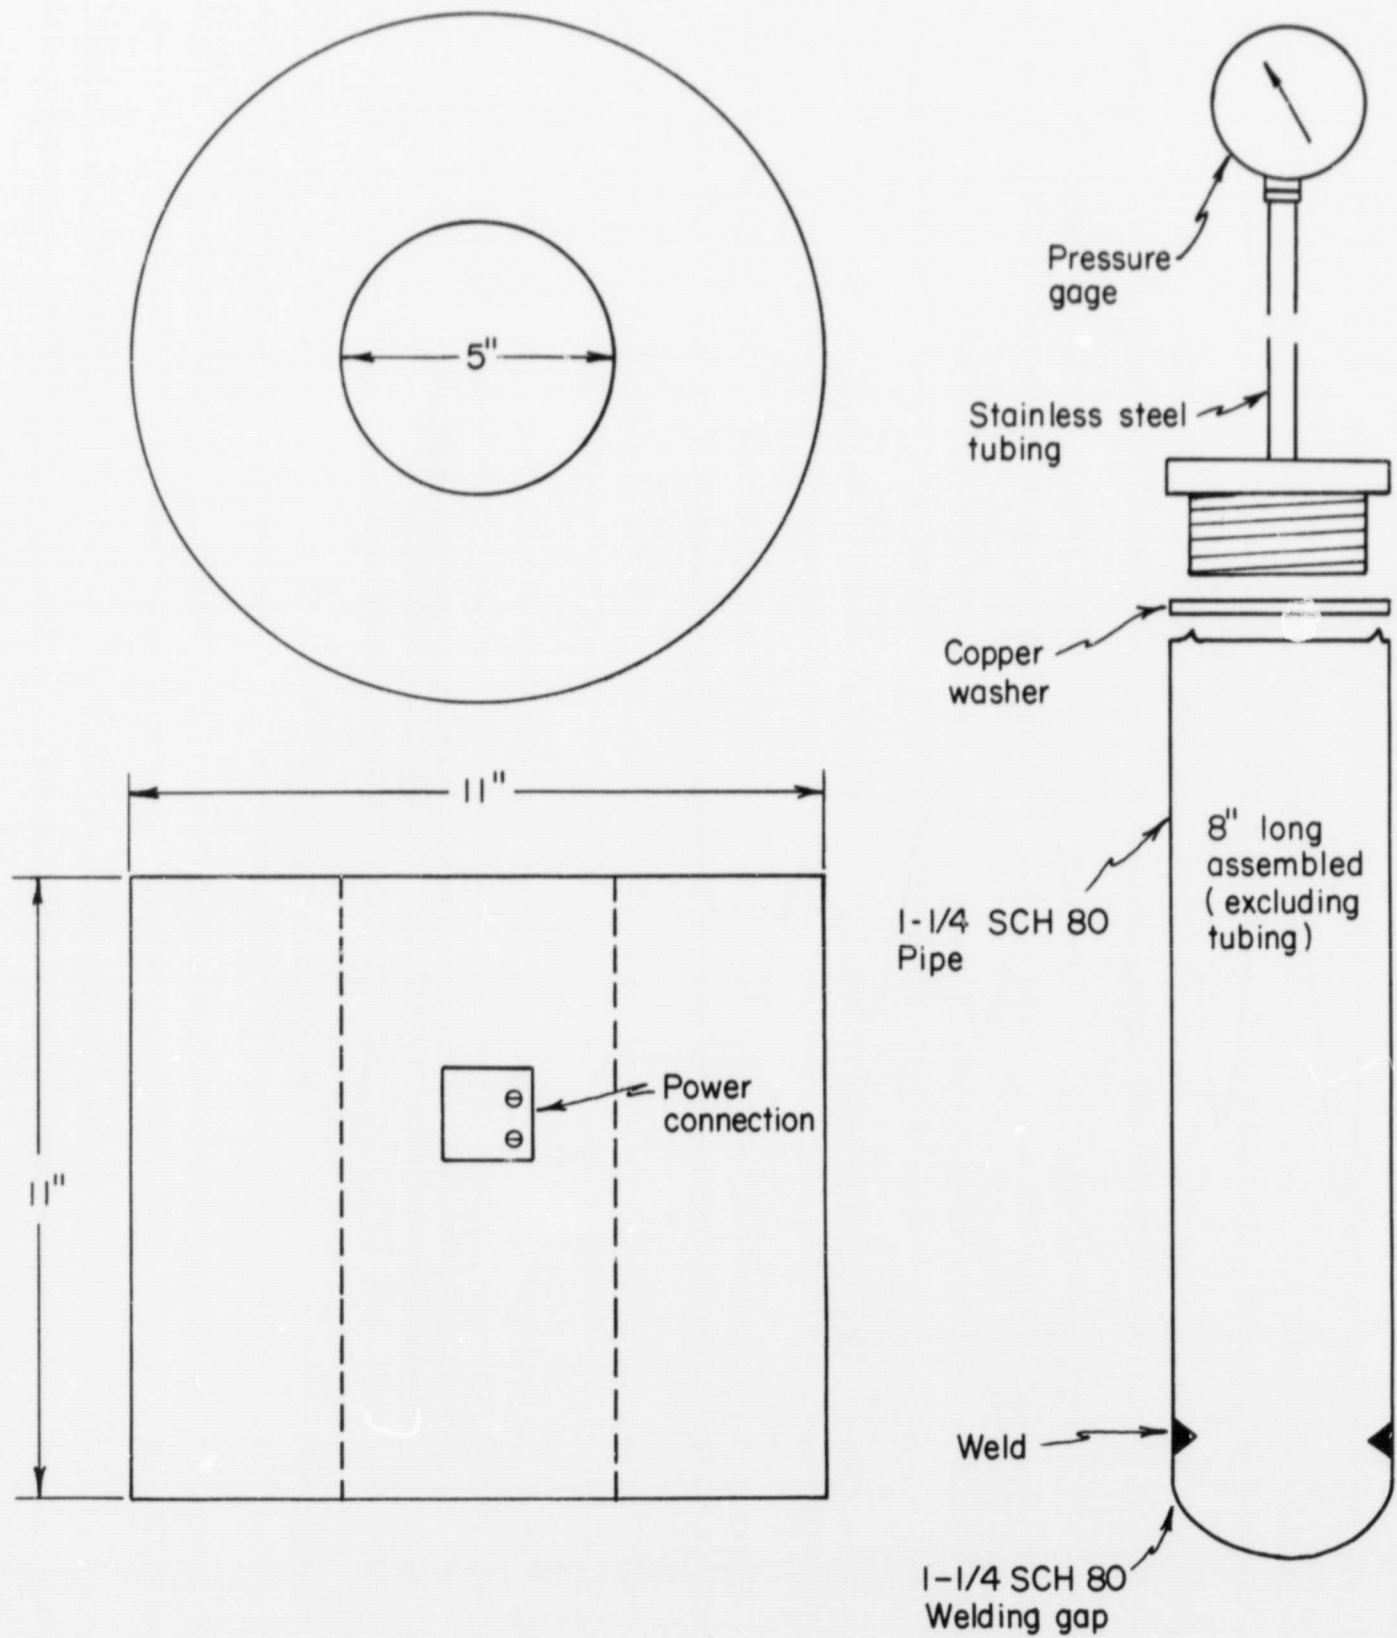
FURNACE AND BOMB FOR AGING SEALANTS
